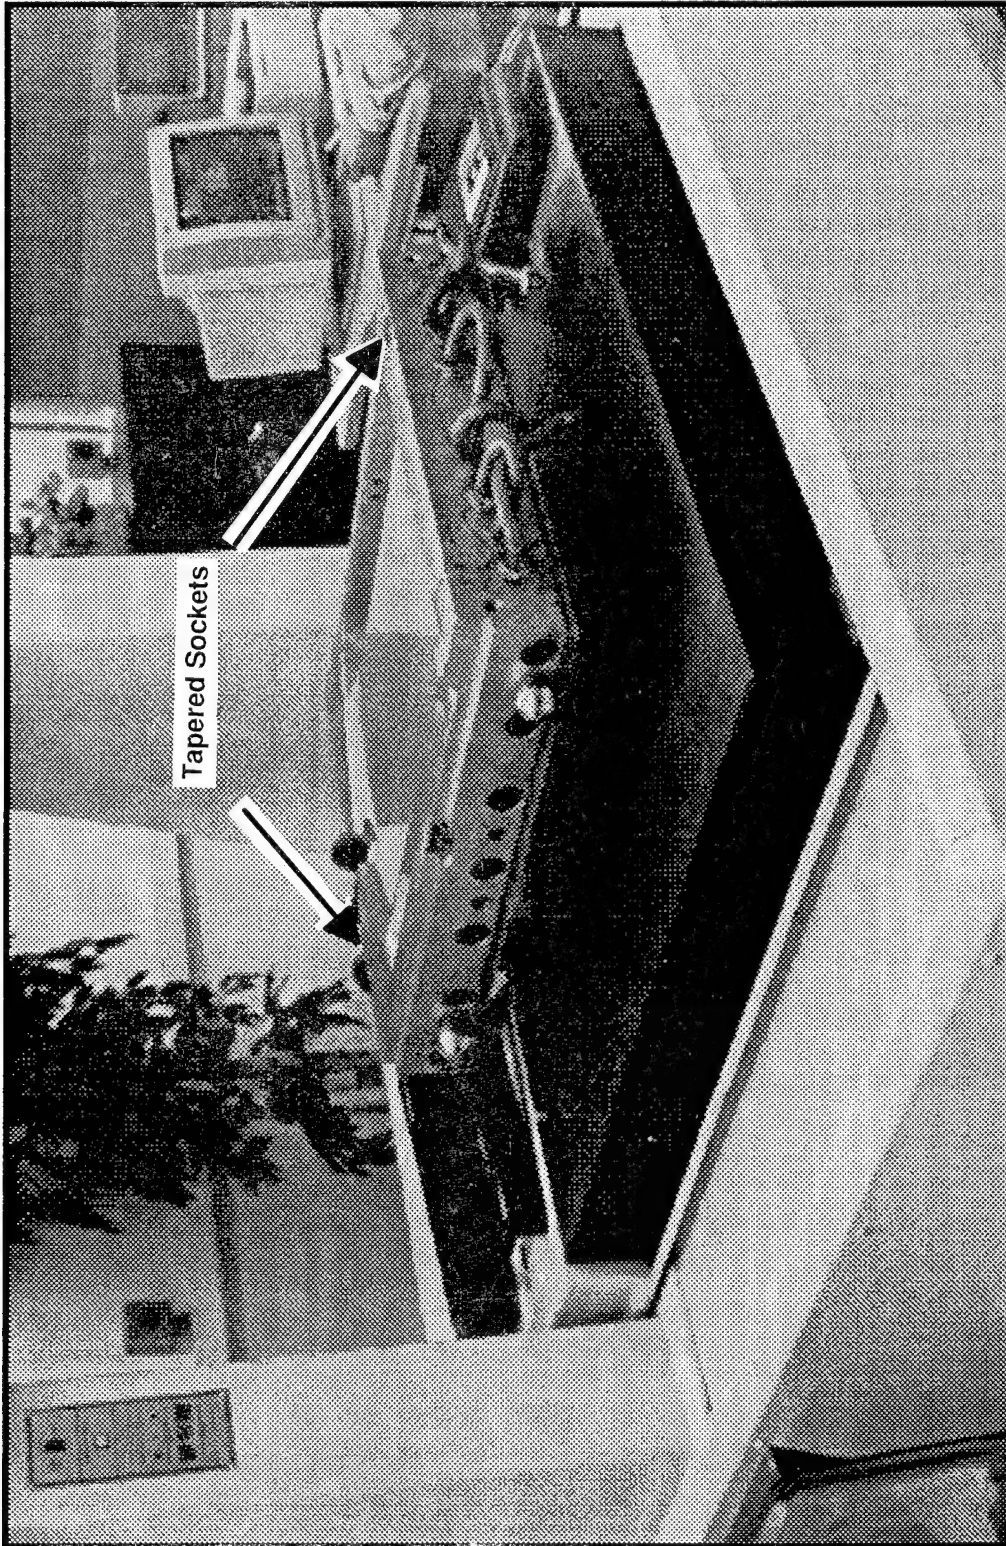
Flat Plate Mold - Tapered Sockets On Parting Plane
